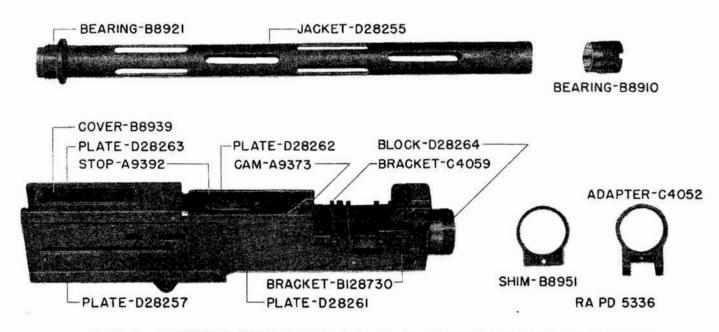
BROWNING MACHINE GUN, CAL. .50, M2, AIRCRAFT - RECEIVER GROUP - PARTS
